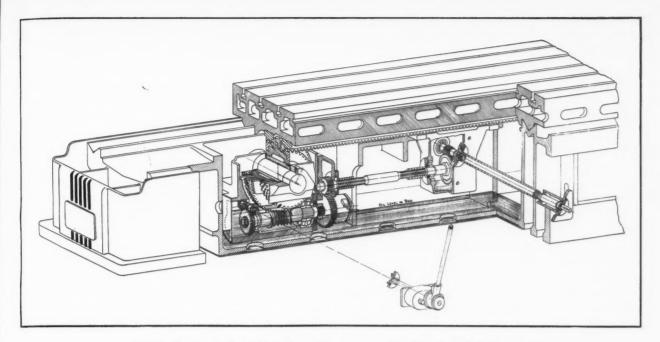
Cut-away view which shows the arrangement of the twin helical-gear and Cone worm drive to the table of the huge airplane skin milling machine
